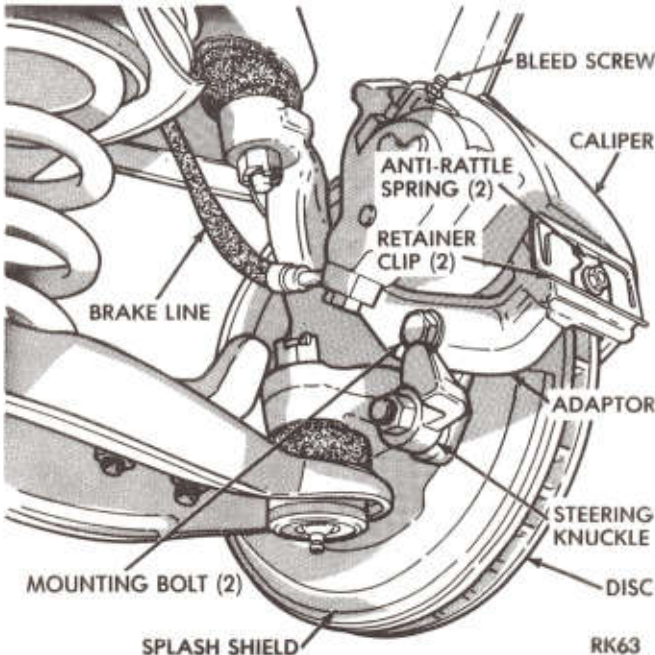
Single Piston Sliding Caliper Assembly (Rear View)
